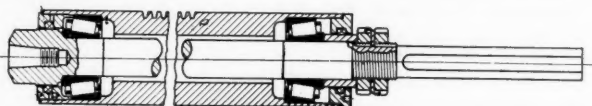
Compact and Easily Assembled Bearing Mounting for the Spindle of a Nonskid Tire Mold Cutting Machine.
